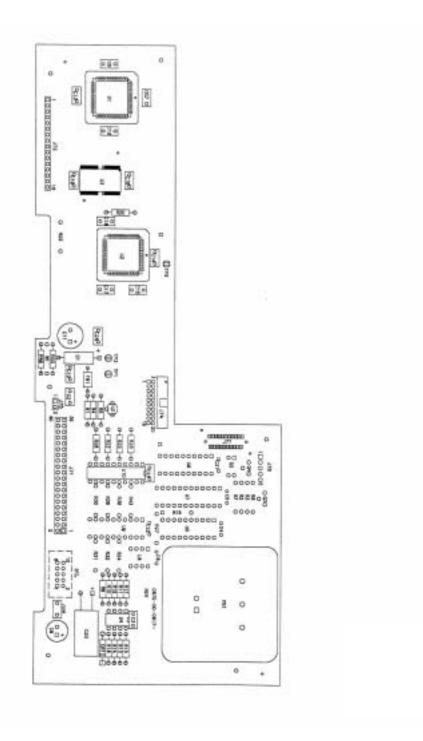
VGA/EL Panel Board/VGA/LCD Panel Board Display Interface Assembly (XG) 0670-00-0617-02 0670-00-0617-03
